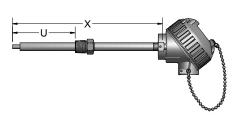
RUGGEDIZED BULLET-NOSED, HARDENED-TOOL STEEL WITH CARBIDE TIP
